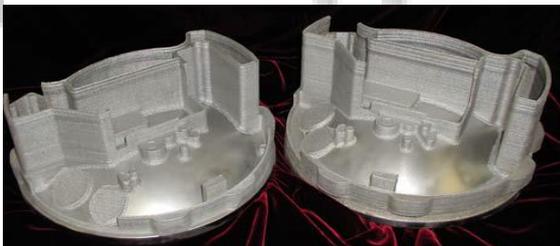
A LENS manufactured housing (Courtesy of Sandia National Laboratory)
